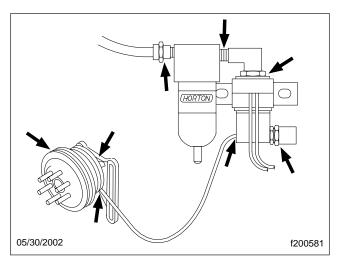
, Checking for Air Leaks (Horton DriveMaster)
